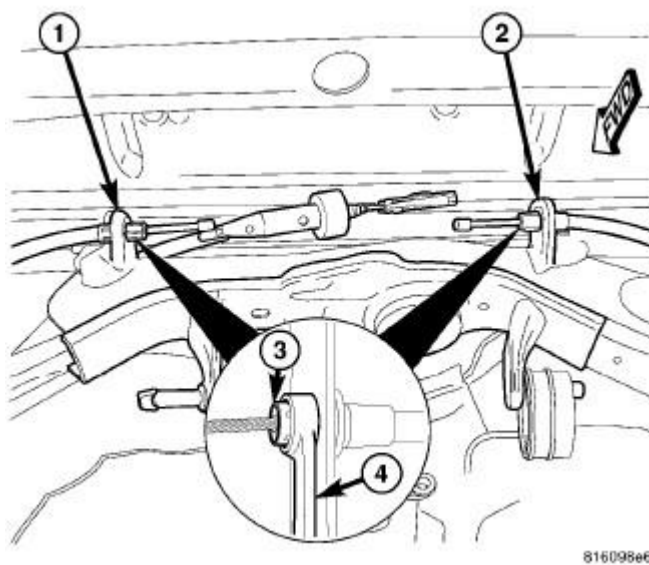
CABLES AT CROSSMEMBER BRACKET
